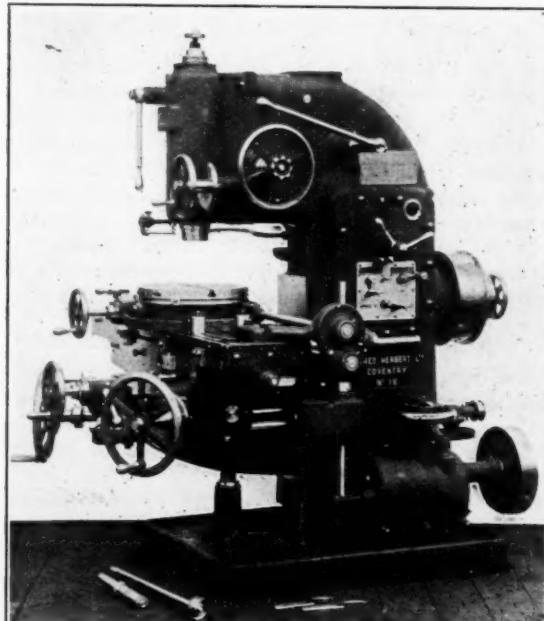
TYPICAL BRITISH VERTICAL MILLING MACHINE
